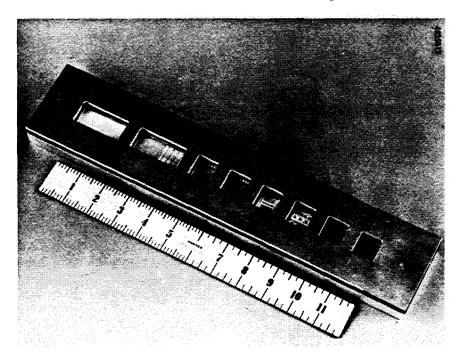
Hybrid masking tooling, completely assembled with typical parts in place. (Fastening devices to hold tooling together not shown.)
